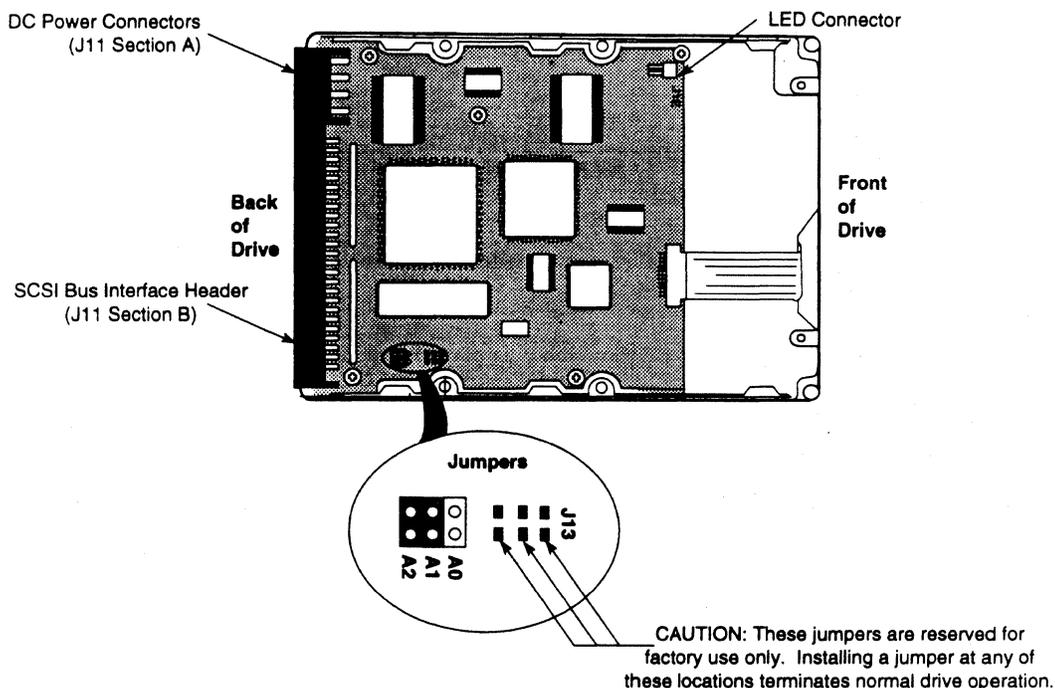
Jumper Pin and Terminator Locations on the Drive PCBA
